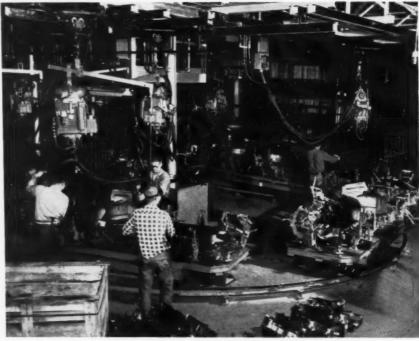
(Left) Merry-go-round conveyor equipped with fixtures for joining the underbody, floor pan, and front end with 1350 spot-welds.
